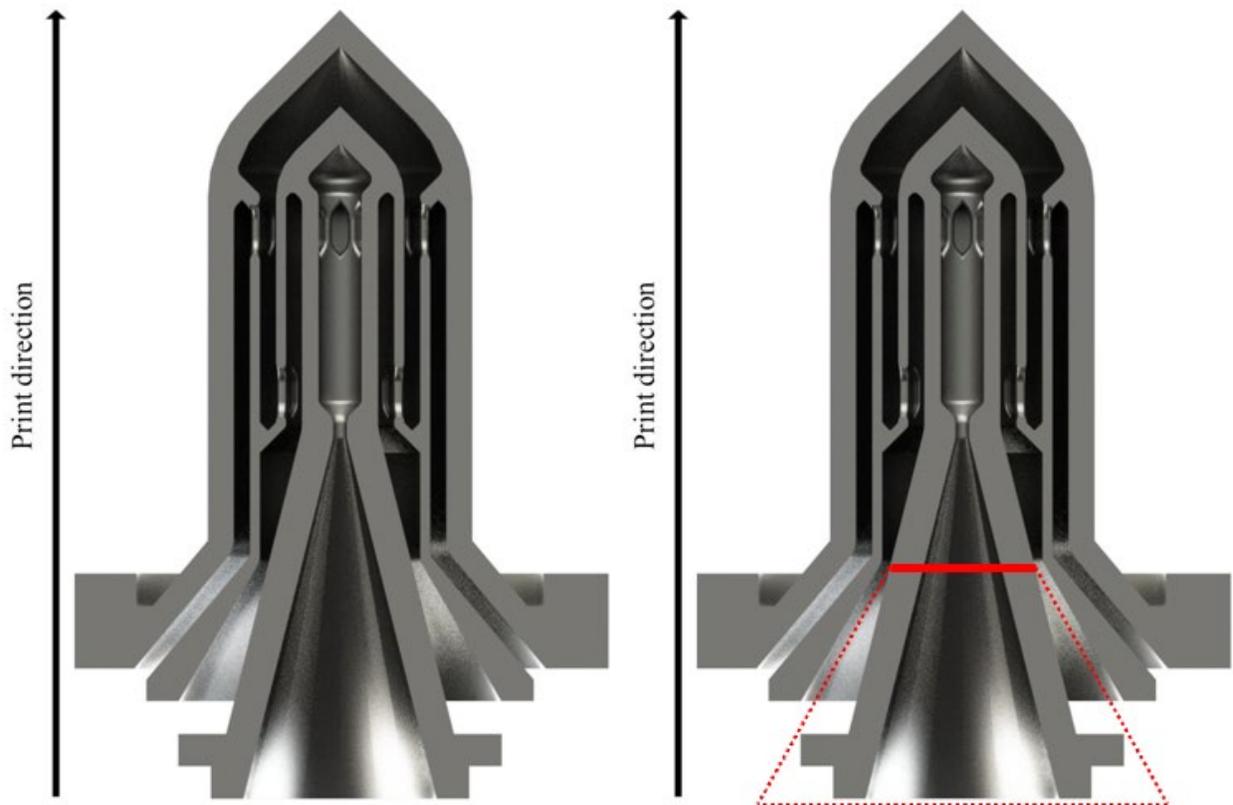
Single-piece prototype (left) versus two-piece resistojet design (right) [35]
